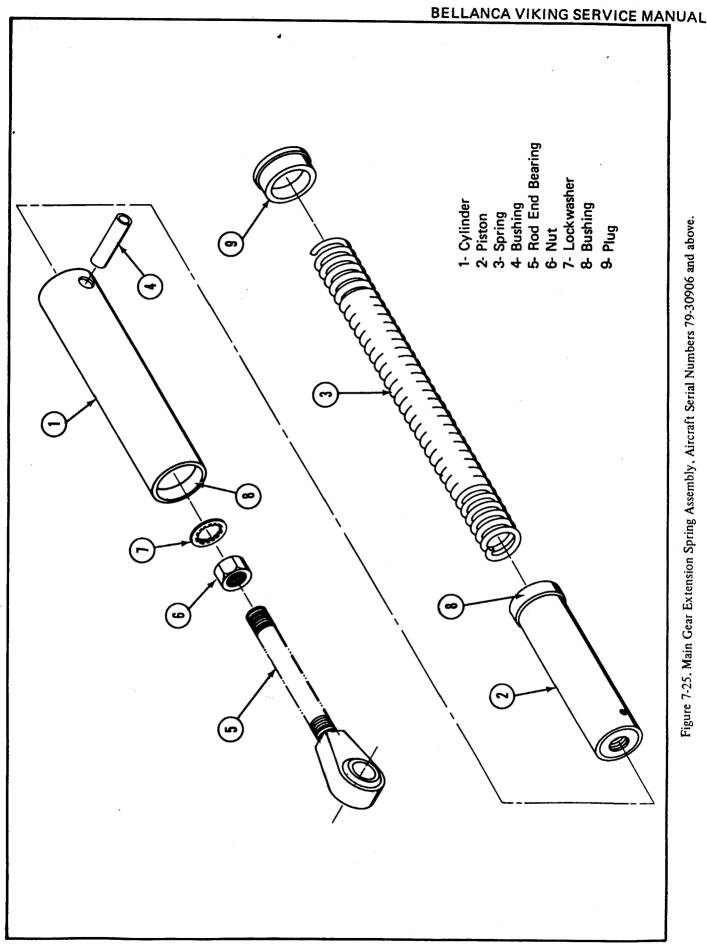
Main Gear Extension Spring Assembly, Aircraft Serial Numbers 79-30906 and above.
